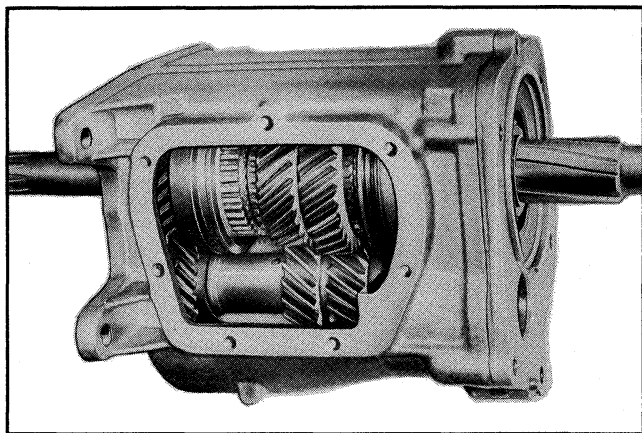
A-17 3-4 Speed Synchronizer Clutch Sleeve in 4th Gear
